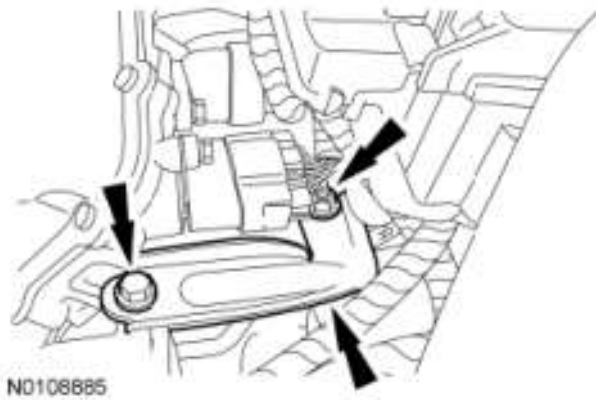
Locating Upper Insulator Bracket Bolt, Nut And Bracket
